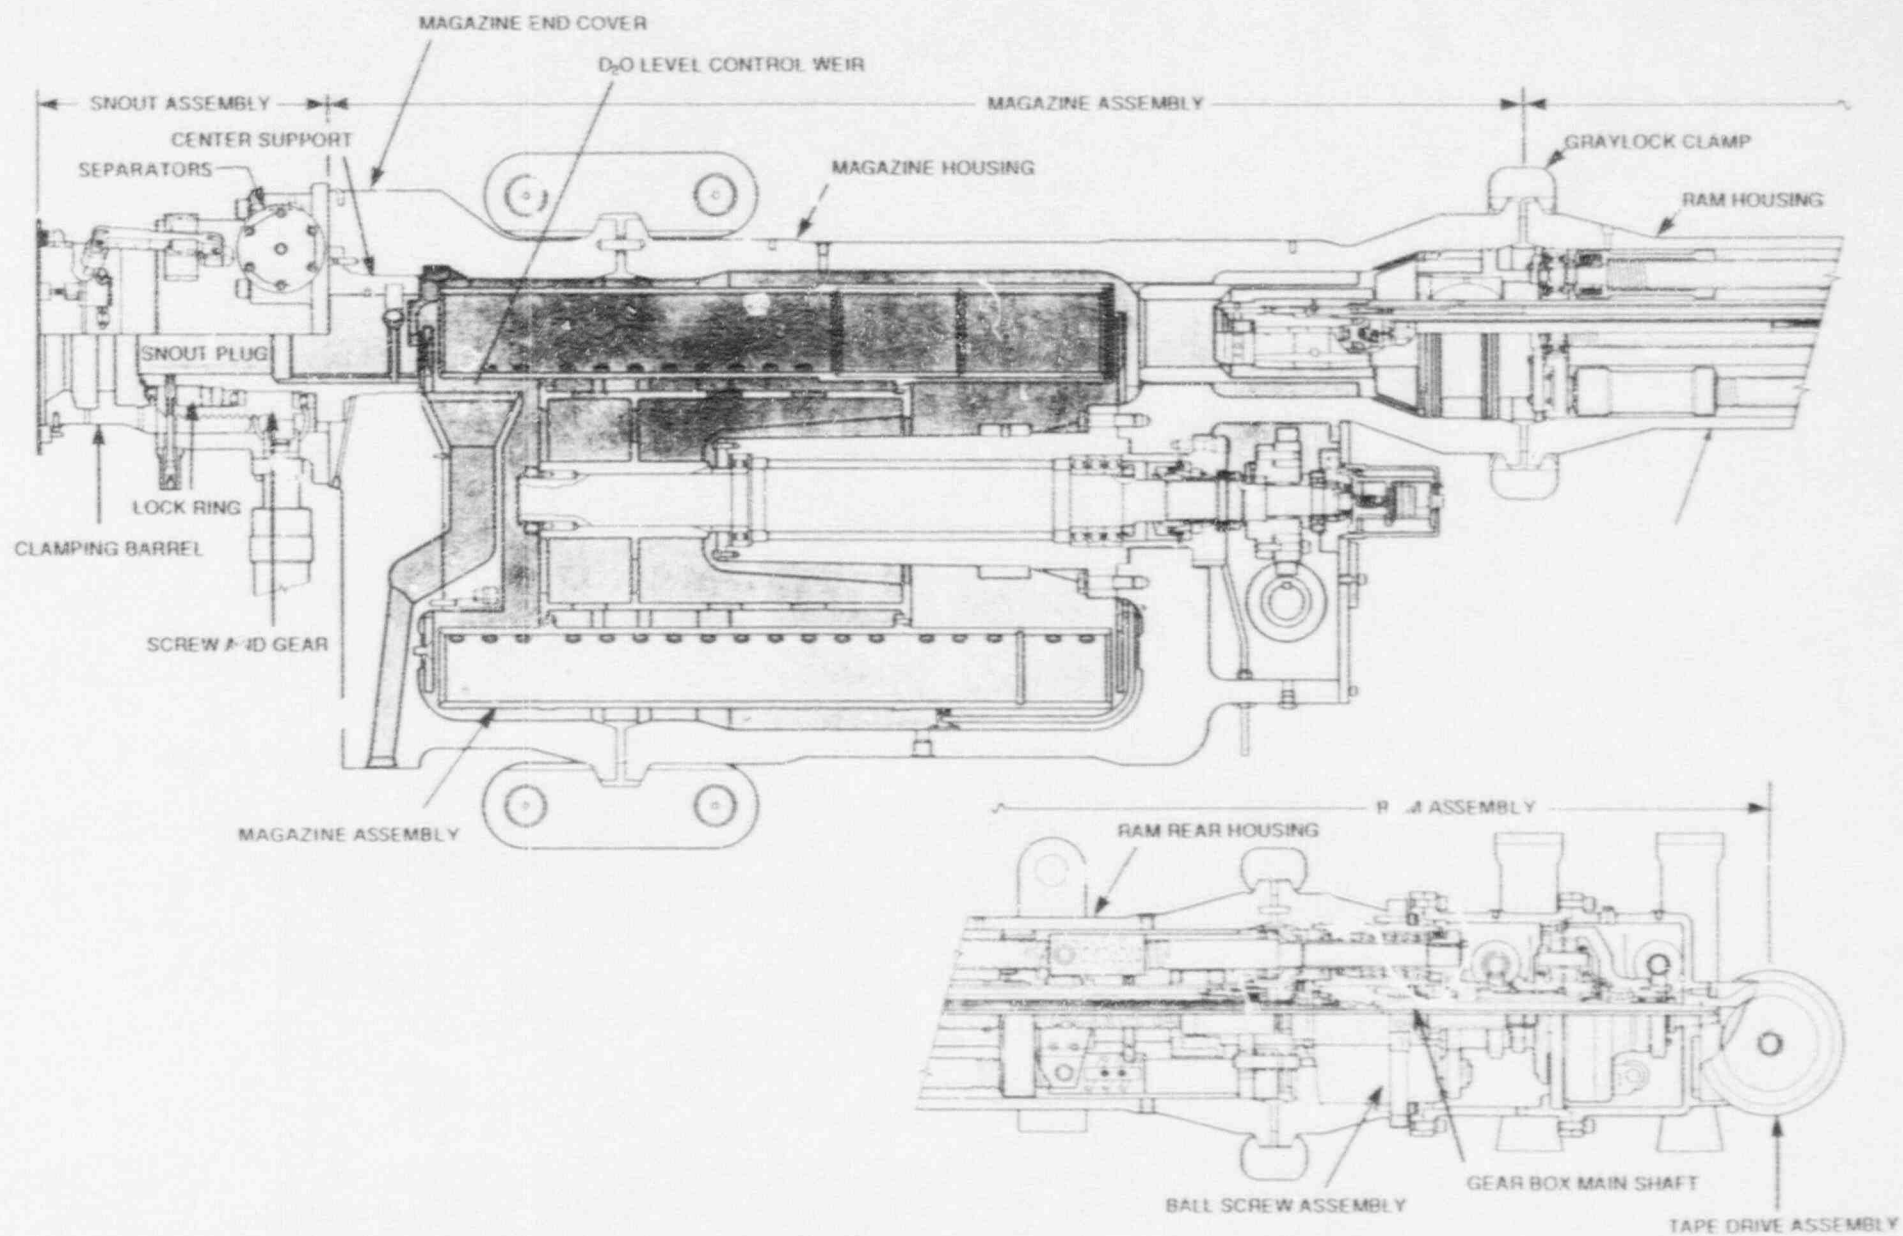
FUELING MACHINE HEAD (SECTIONAL VIEW)
